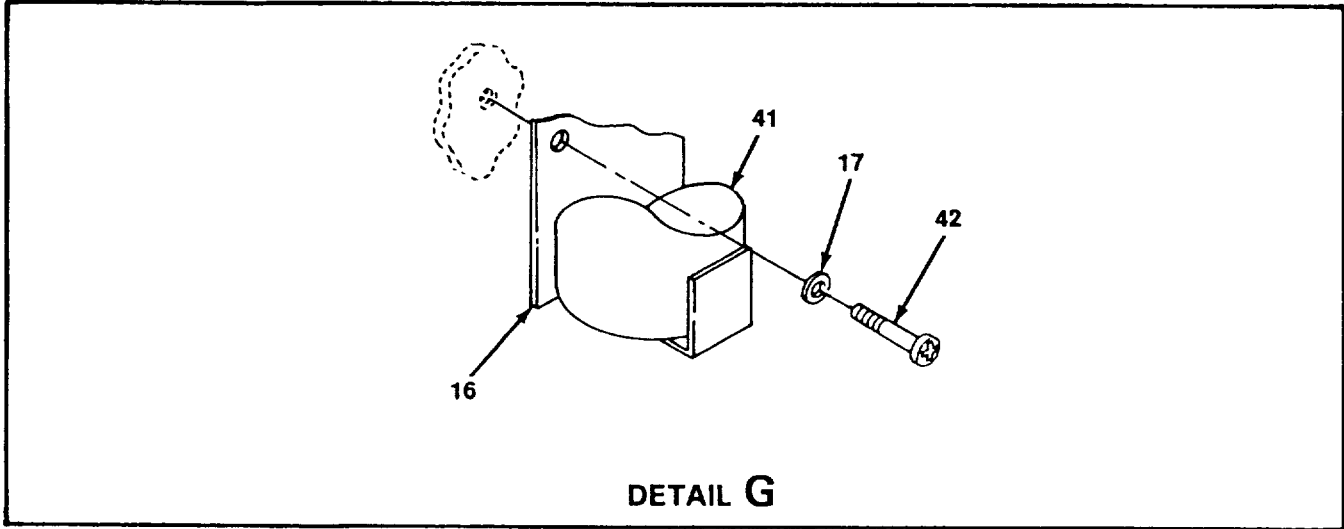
Interior Roadside Wall (Sheet 1 of 2).
